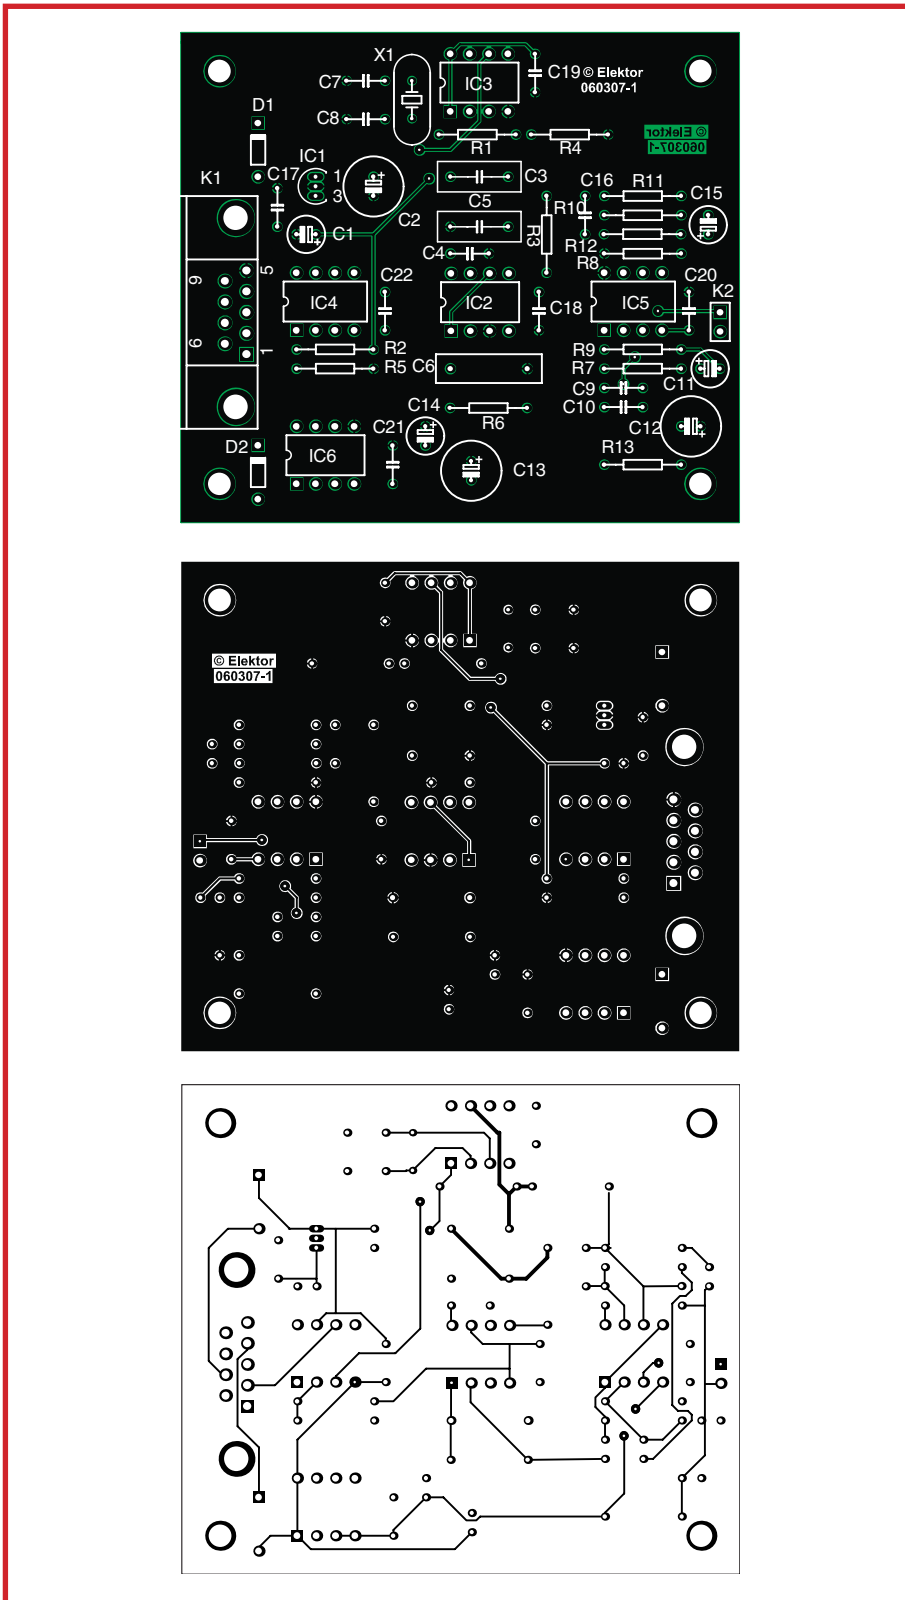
If you would like to make a PCB yourself you can get going with this layout.
